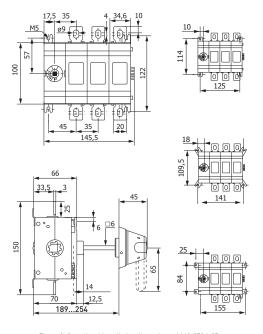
Overall and installation dimensions of 160-250 A 3P switch disconnectors
